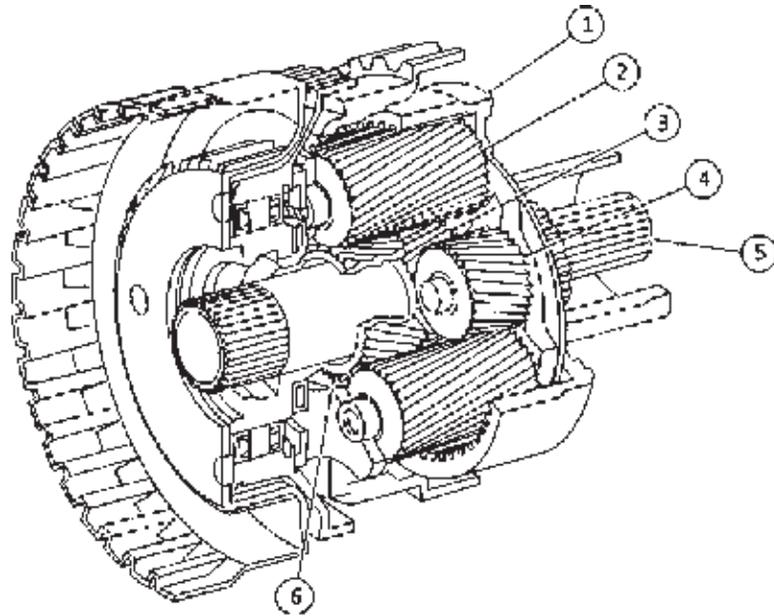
Ravigneaux gear set: 1 – ring gear; 2 – long planet gear; 3 – small planet gear; 4 – short planet gear; 5 – transmission input shaft; 6 – large sun gear. (Source: Ford Motor Company)
